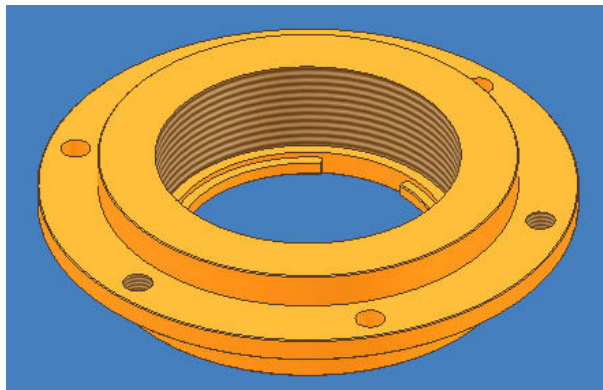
Solid model drawing of the CCD-Telephoto Lens interface.
